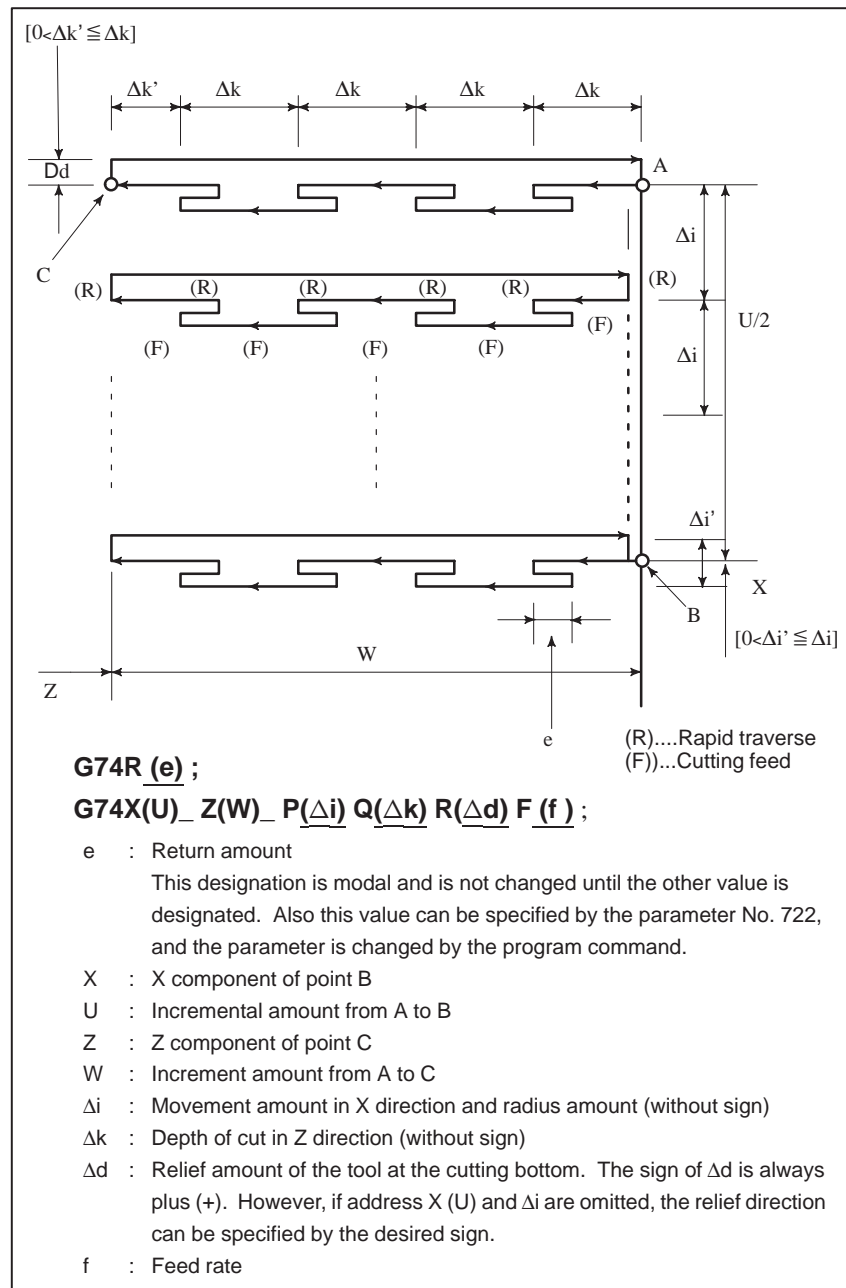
Cutting Path in End Face Peck Drilling Cycle
